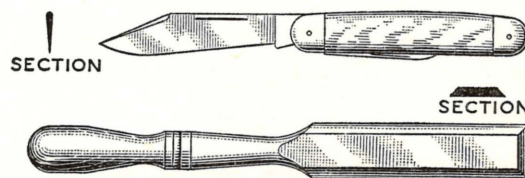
A chisel is a beveled-edge tool. A knife is a wedge-edge tool
